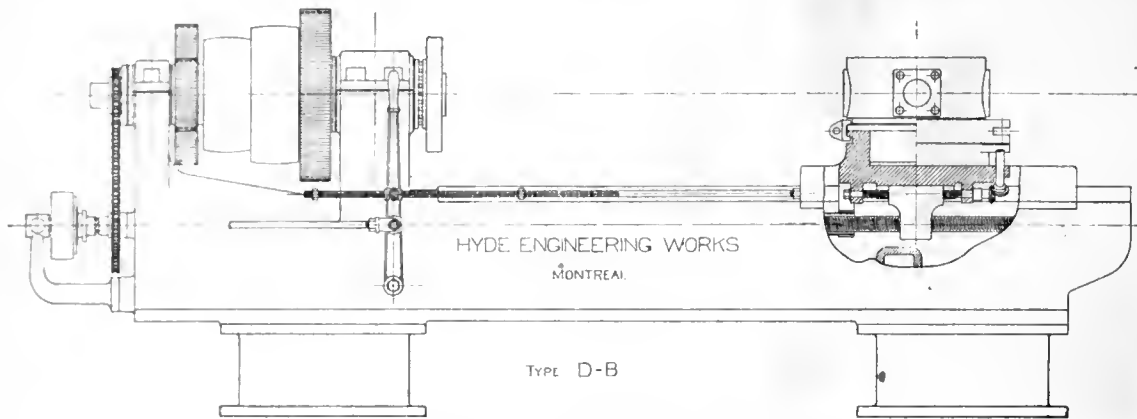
HEAVY DUTY SINGLE PURPOSE LATHE.
